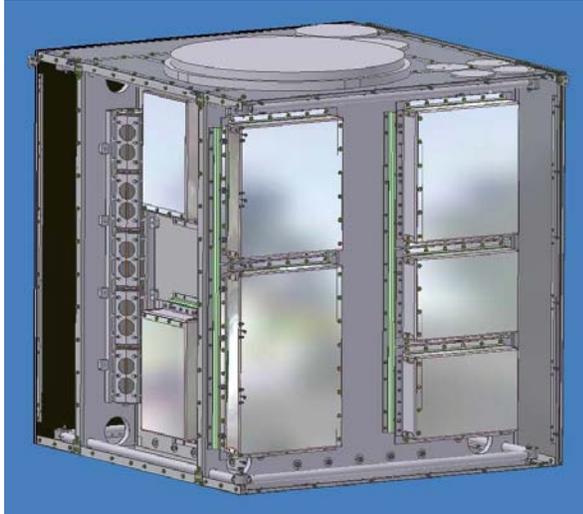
Modules mounted in spacecraft with NMH cell string mounted on the left side.
